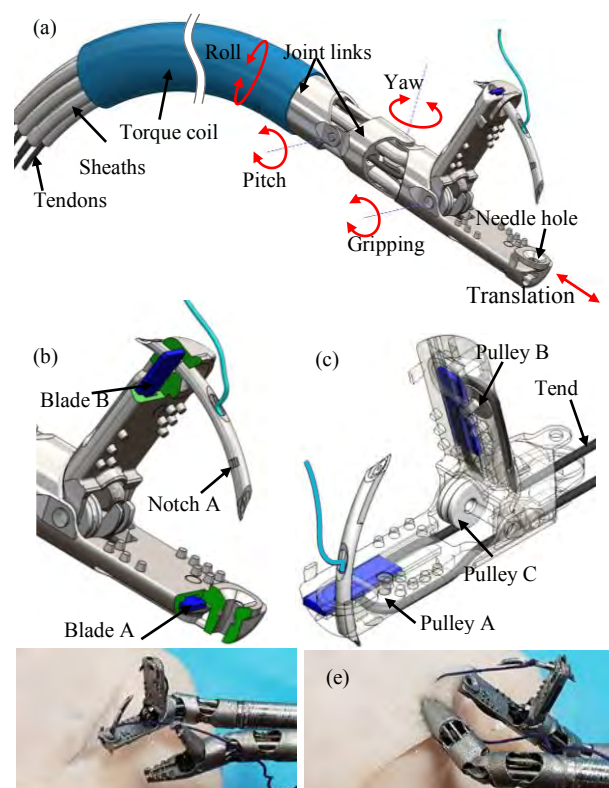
(a) suturing arm; (b) needle and blade engagement, (c) tendon-controlled blades, (d-e) working prototype.
